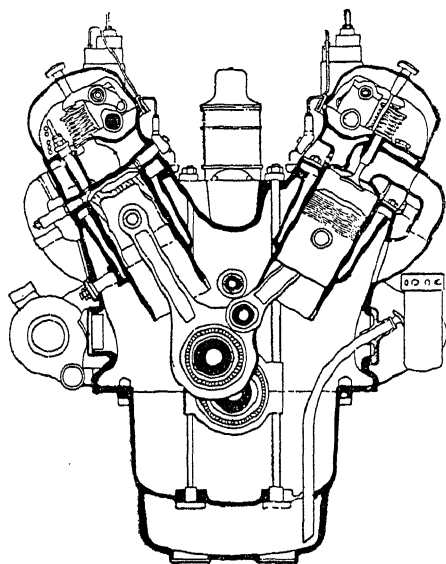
The Maybach twelve-cylinder Vee-type compression ignition engine.
